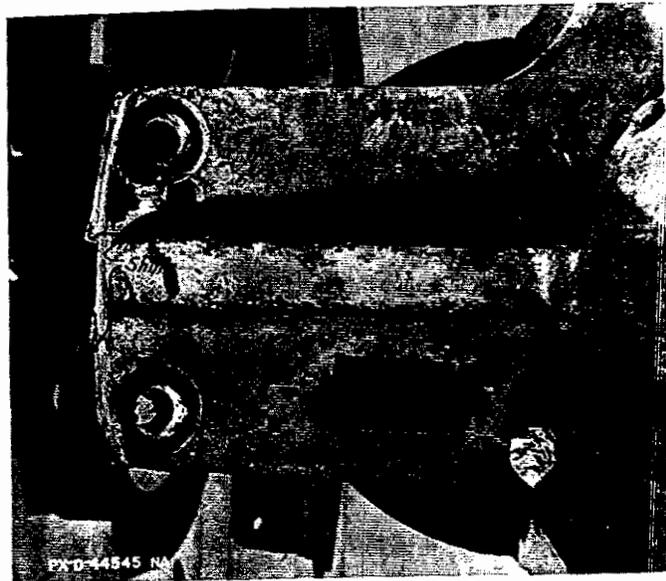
Girishk Powerplant Unit 1. One leg of bearing bracket showing boltholes drilled oversize and filled with lead, and shimming to compensate for turbine misalignment.
